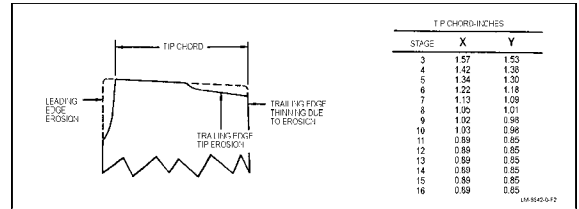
Stage 3 - 16 Compressor Blade Tip Erosion
